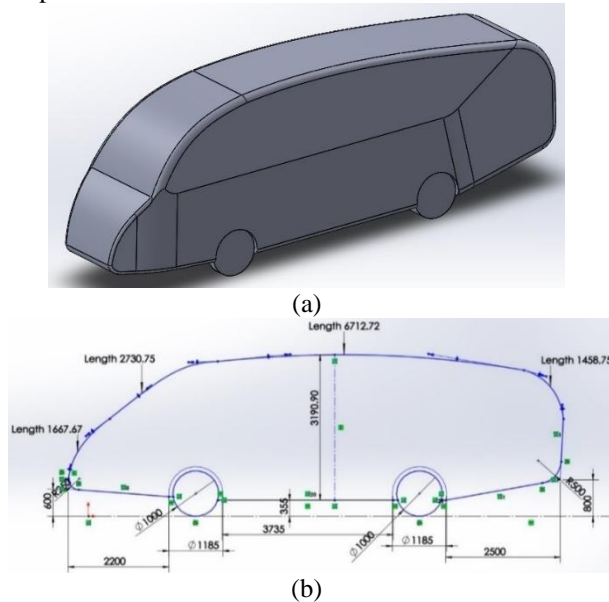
(a) Isometric view, (b) Dimensions (mm) of M_2
